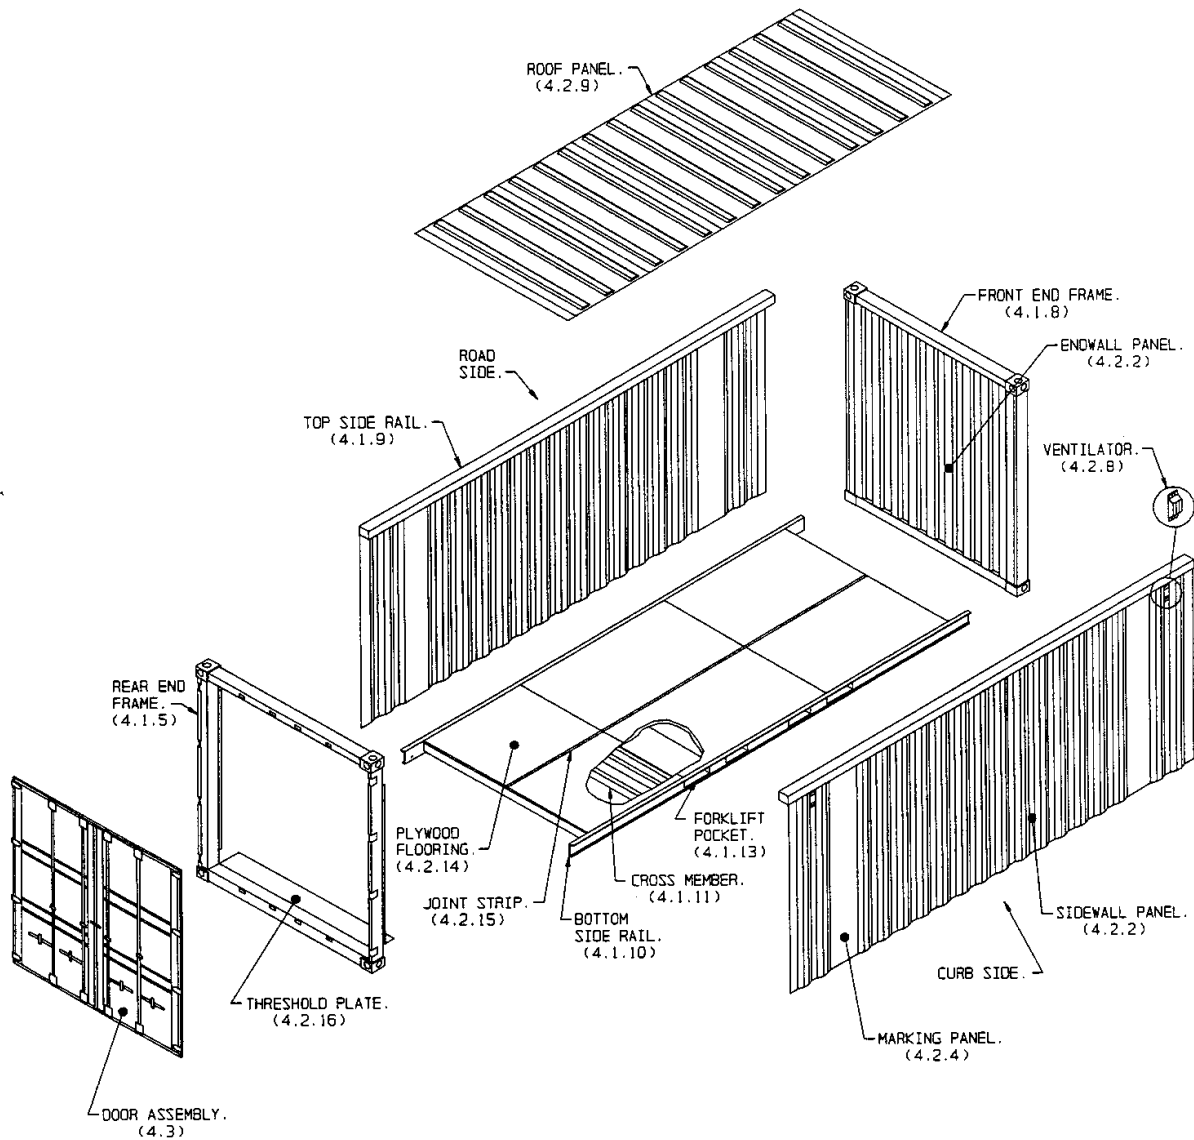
A - TYPICAL STEEL CONTAINER (EXPLODED VIEW)
